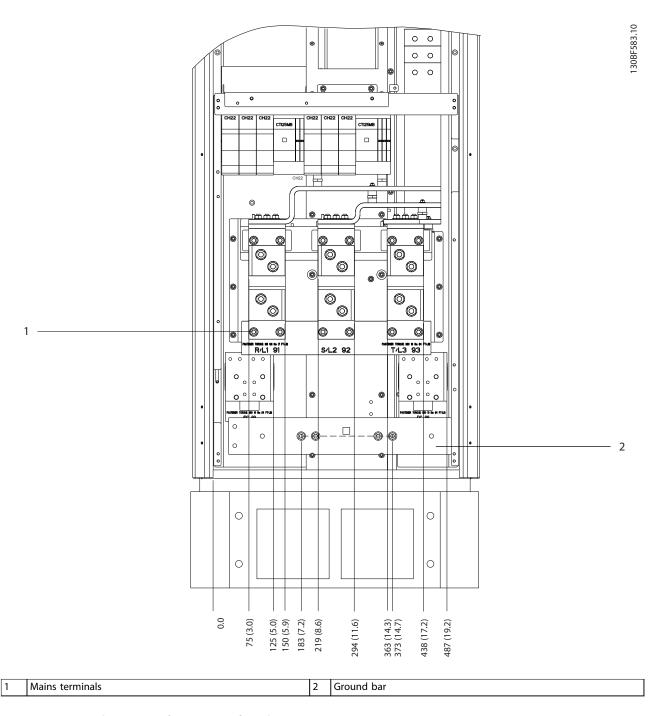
Terminal Dimensions for F1-F4 Rectifier Cabinet, Front View
